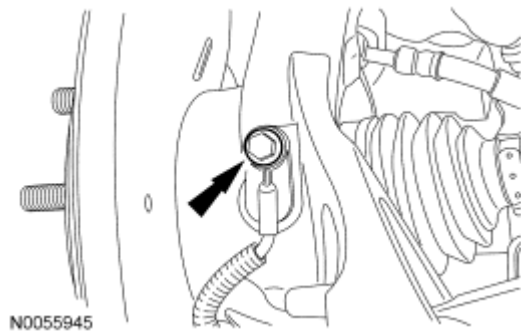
Identifying LH & RH Wheel Speed Sensors Bolt
